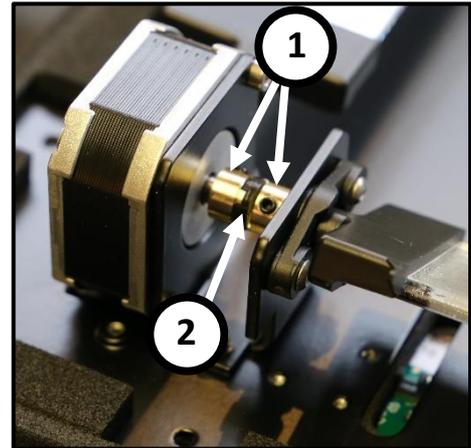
MOTOR-MIRROR COUPLING PARTS
